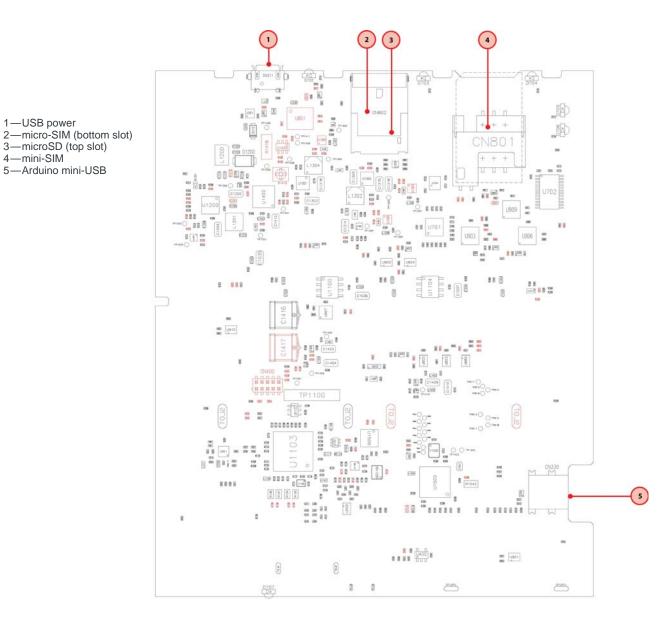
mangOH green Assembly - Bottom Side Switches/Connectors
